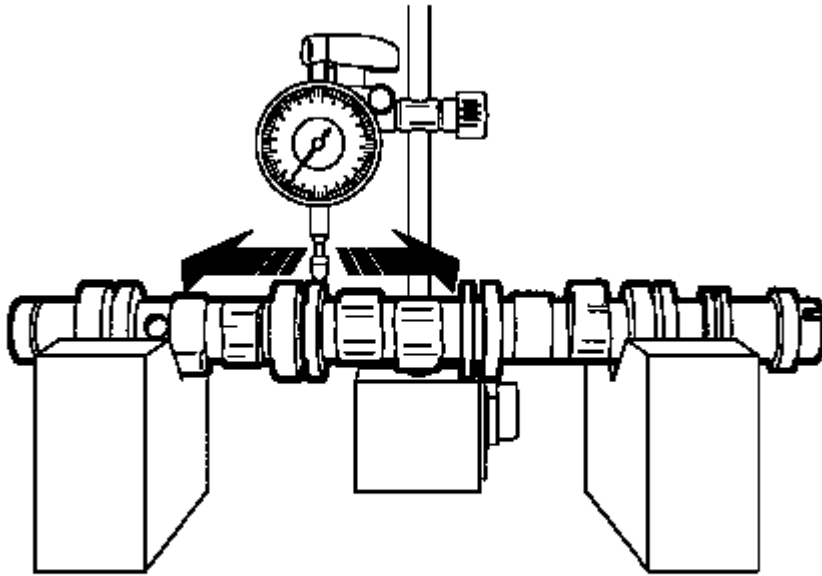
Measuring Excessive Camshaft Runout Using Indicator
